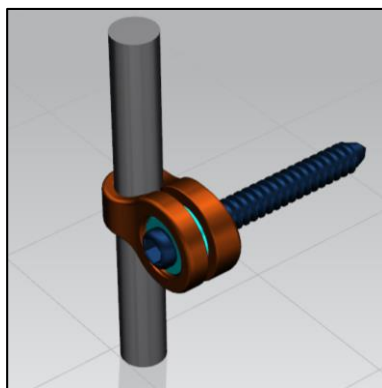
A novel concept: Bone screw passes through a threaded hole inside the connector screw.
